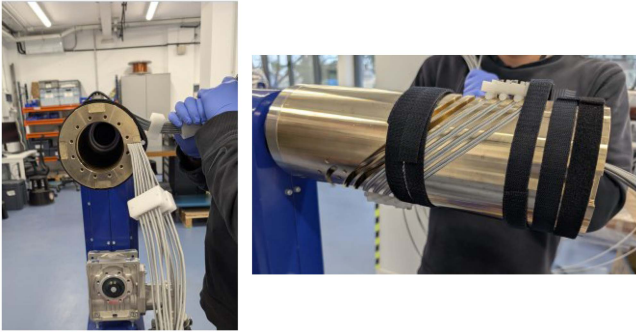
(left) positioning of the cables into the grooves (right) detail of the clamping system of the cables.
